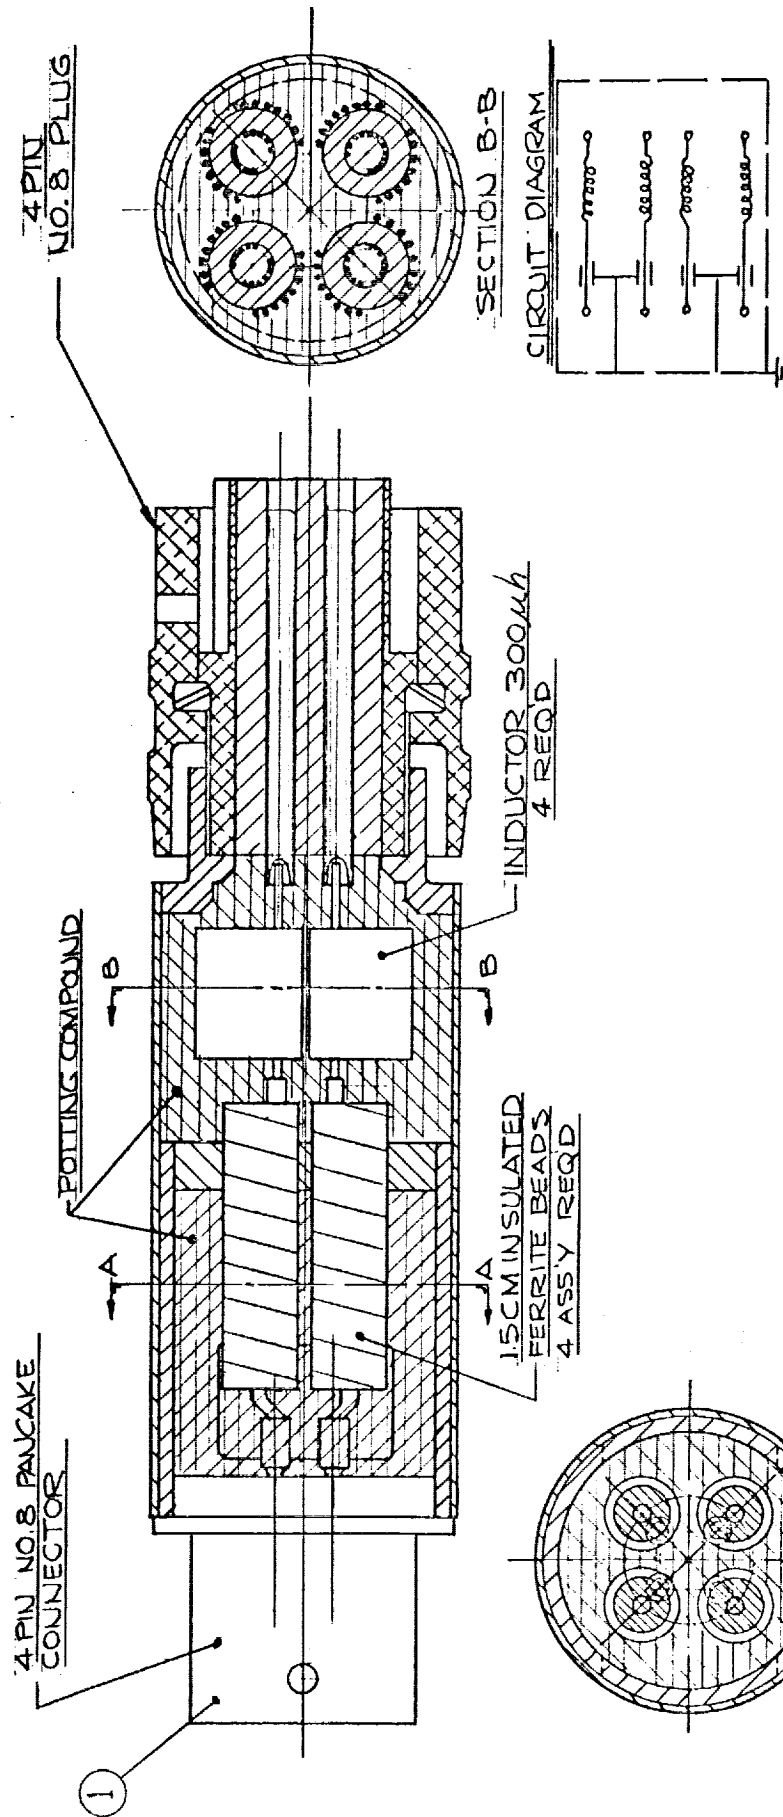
ASSEMBLY DRAWING OF 4-PIN HYBRID FILTER
